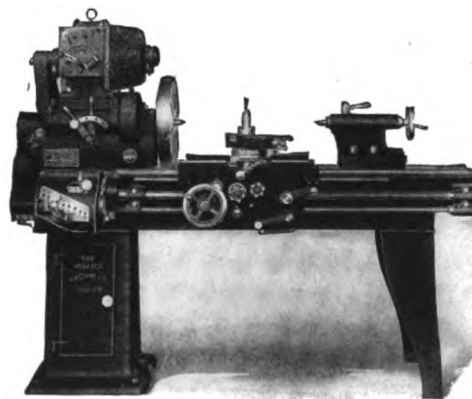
Monarch 16-Inch Motor Driven Lathe
